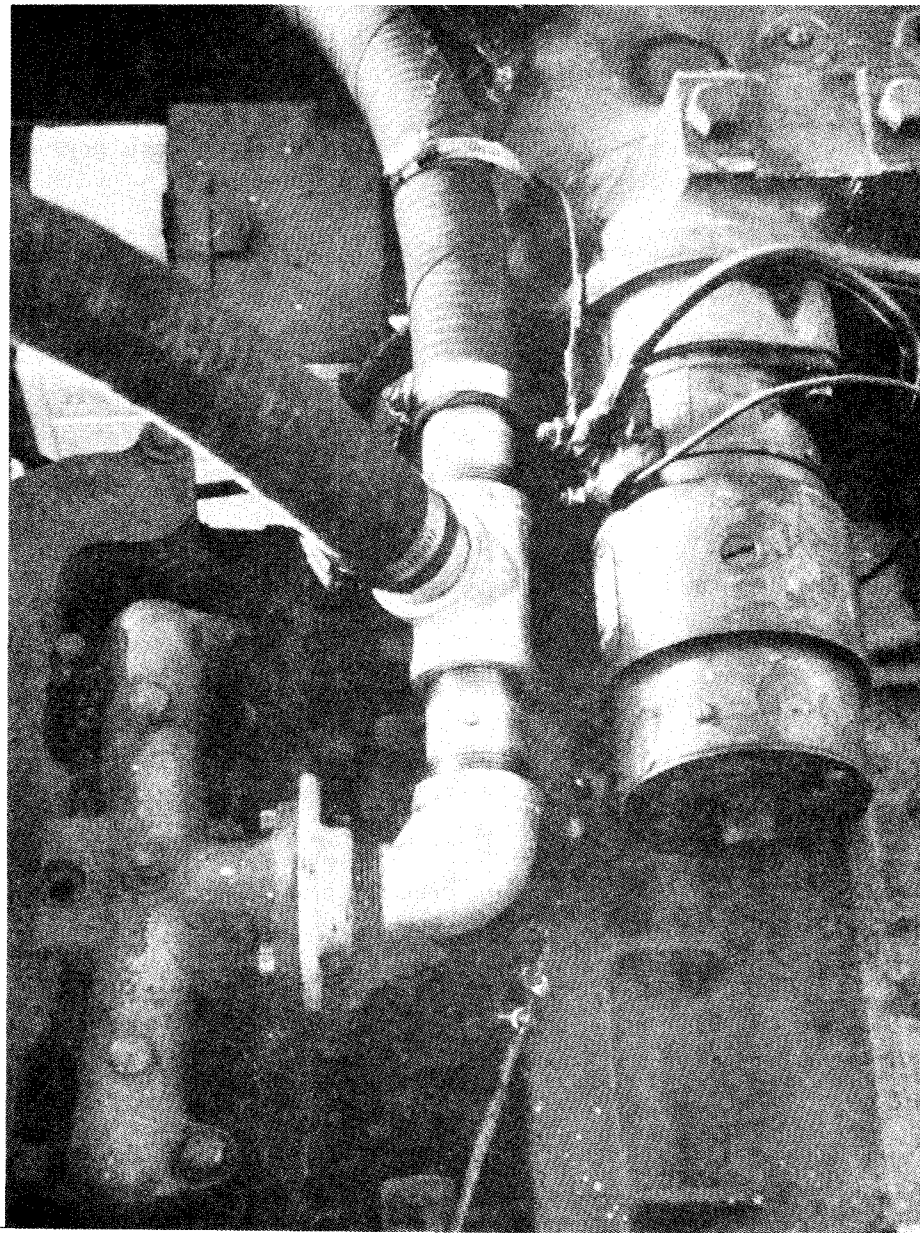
Carburetion unit attached to engine's existing intake manifold. Wood gas enters from the side of the tee; air enters from the right-hand end. The butterfly valve at the right (partially obscured) is connected to the air control (choke) cable; the left valve is connected to the throttle linkage.
